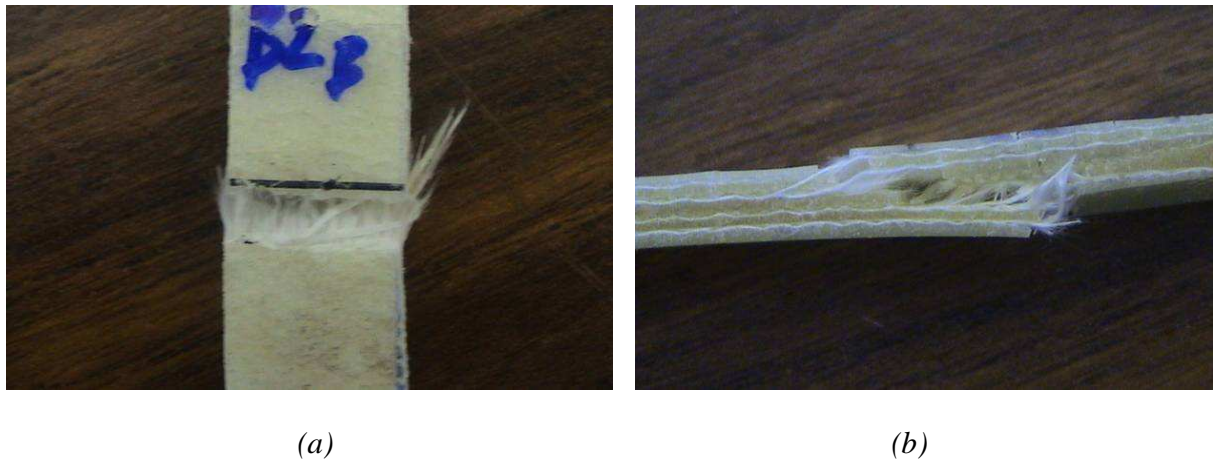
Polypropylene / Woven S2 Glass test coupon after tensile test showing (a) front view and (b) side view.
